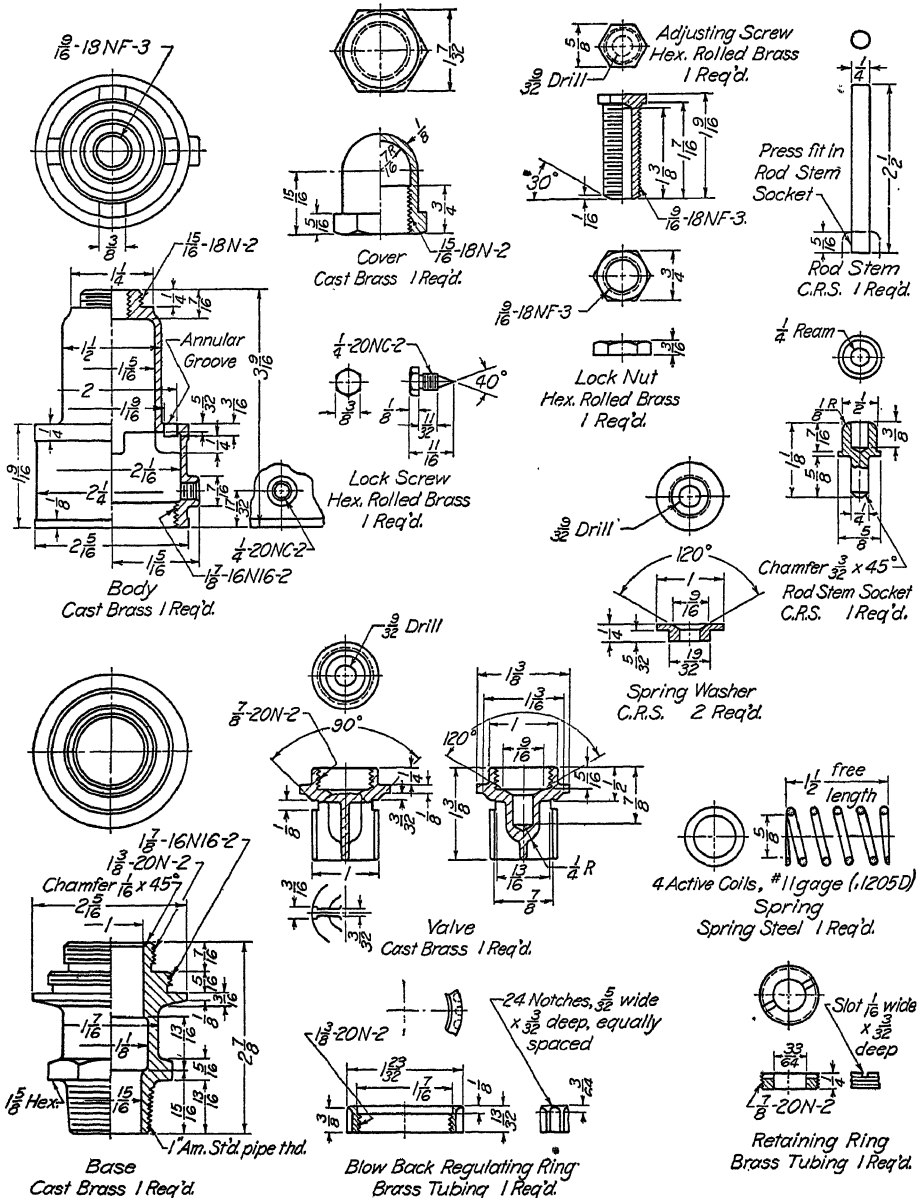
Brass relief valve. (Courtesy of Crane Company.)
